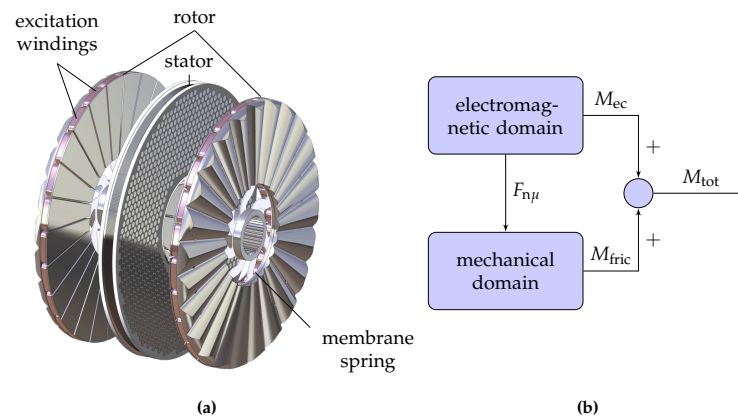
Exemplary CAD model of a hybrid brake (a) and superordinate operating principle of the hybrid brake (b).
